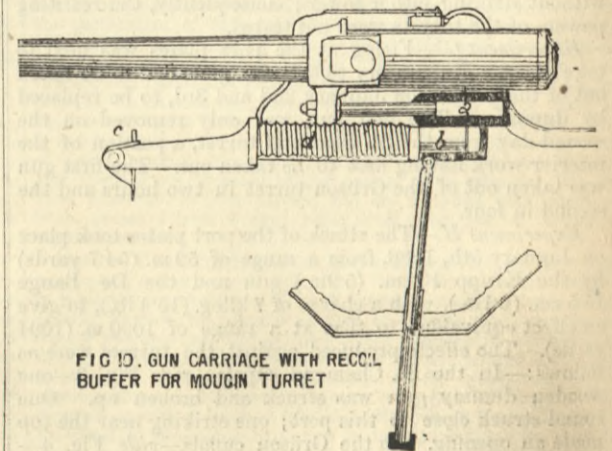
GUN CARRIAGE WITH RECOIL BUFFER FOR MOUGIN TURRET
